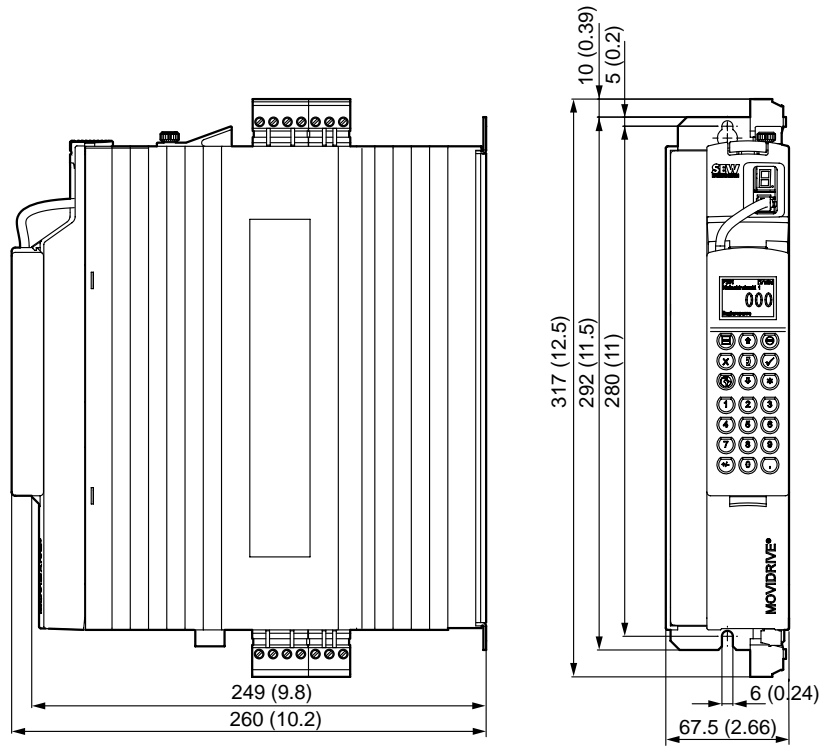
Dimensions for MDX60B size 0M, dimensions in mm (in)
